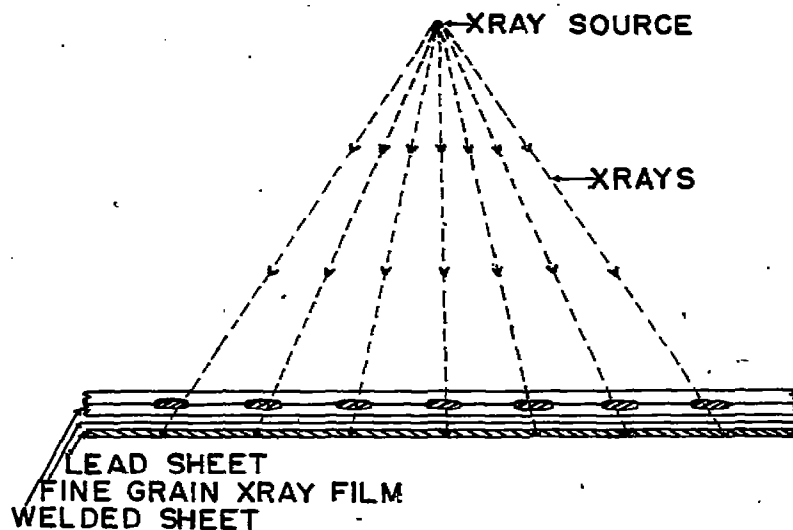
RADIOGRAPHY OF SPOT WELDS.
